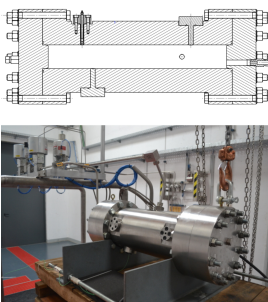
(a) Technical drawing of chamber (b) chamber after manufacturing
